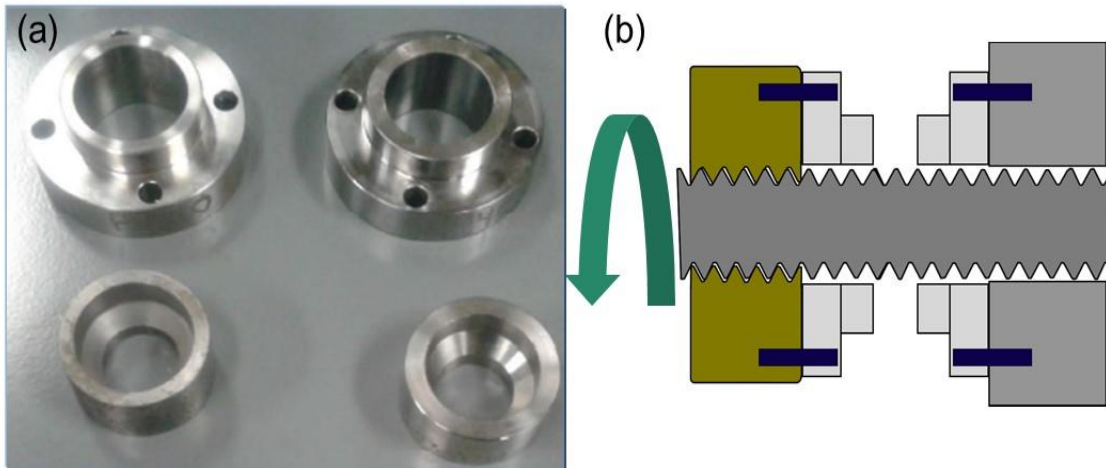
(a) Image of the new ring shaped test specimens; and (b) Diagram of how the specimens fit into the new load cell assembly, illustrating the dynamic (left) and stationary (right) specimens.
